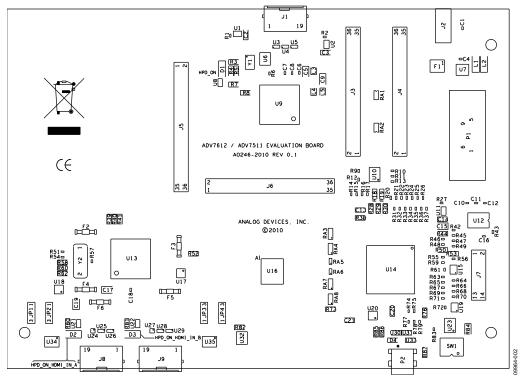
Assembly Drawing (Top Side) of the EVAL-ADV7612-7511
